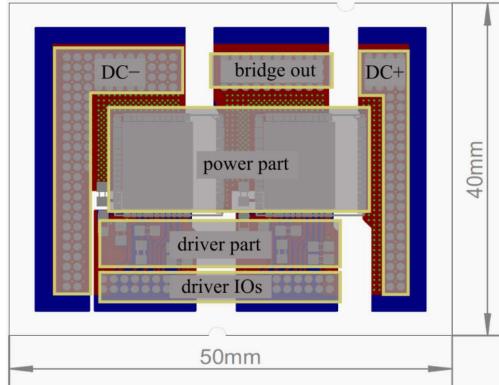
Designed IMS board with marked areas for the BGA solder joints and components
